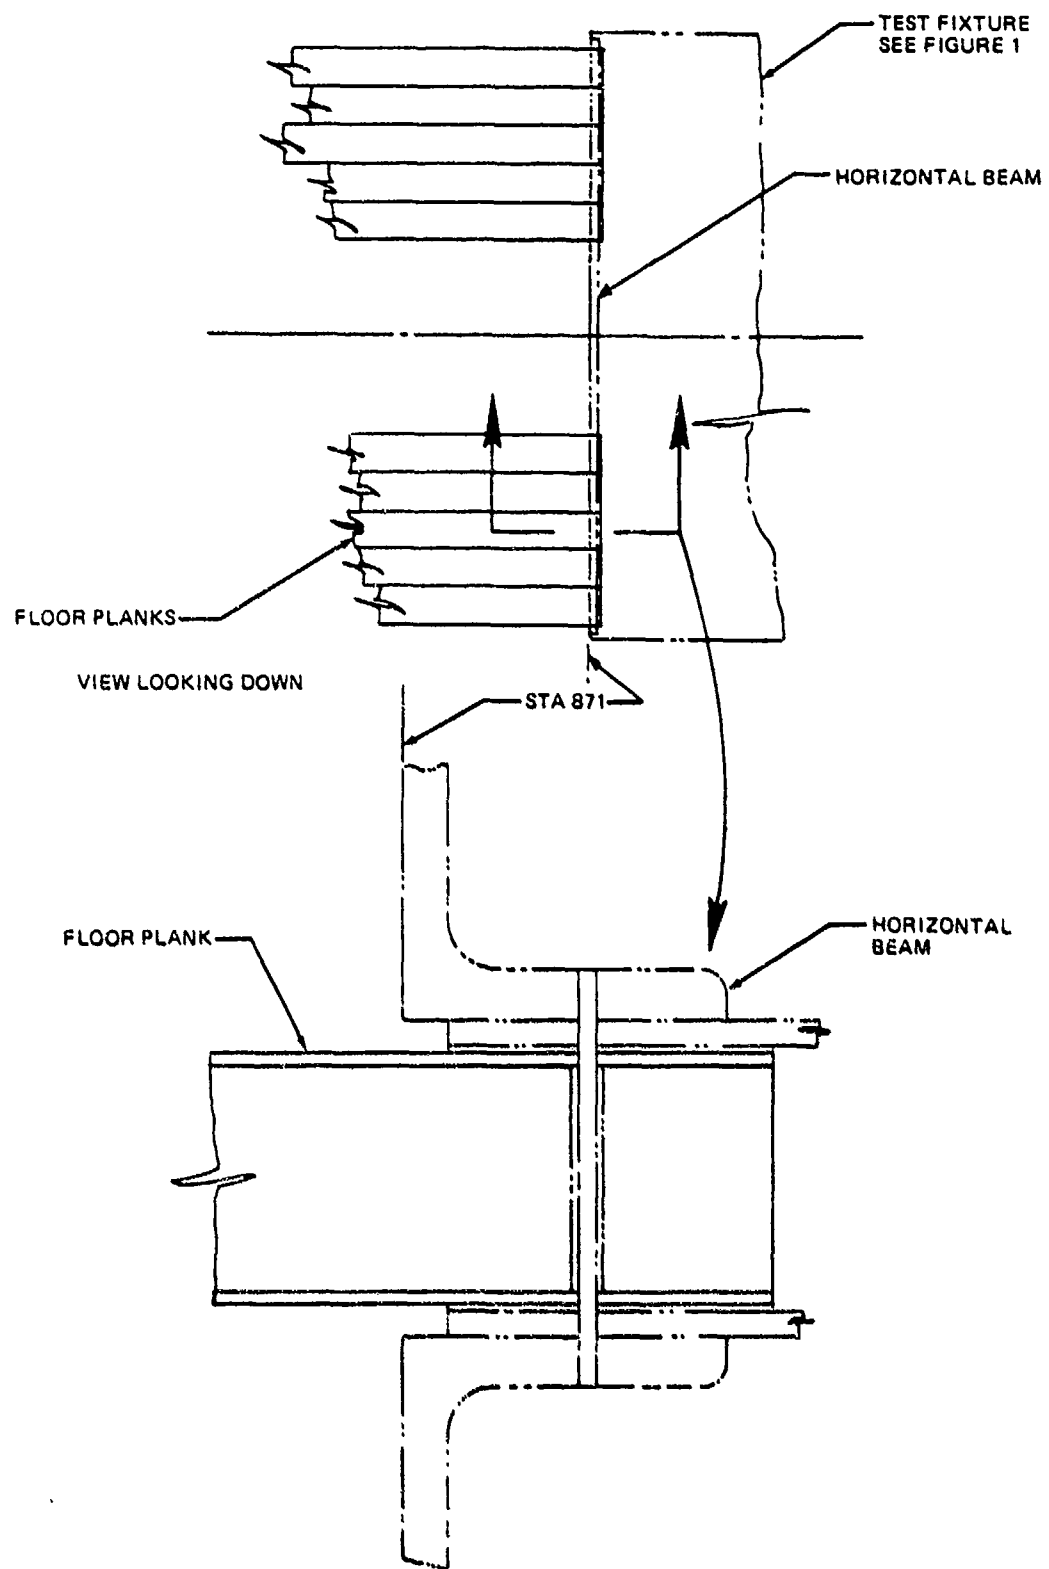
FLOOR BEAM TO AFT TEST FIXTURE ATTACH
